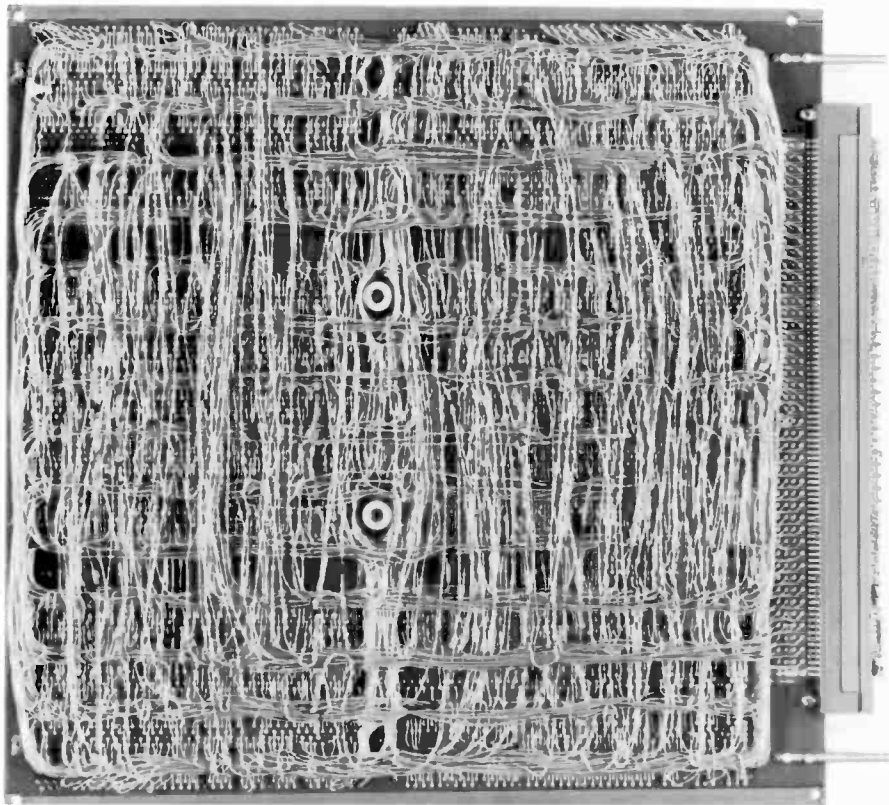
Welded-wire circuit board. Interconnections between the integrated circuit components are made on the backplane of the circuit board using small-gauge wire welded to pins.
